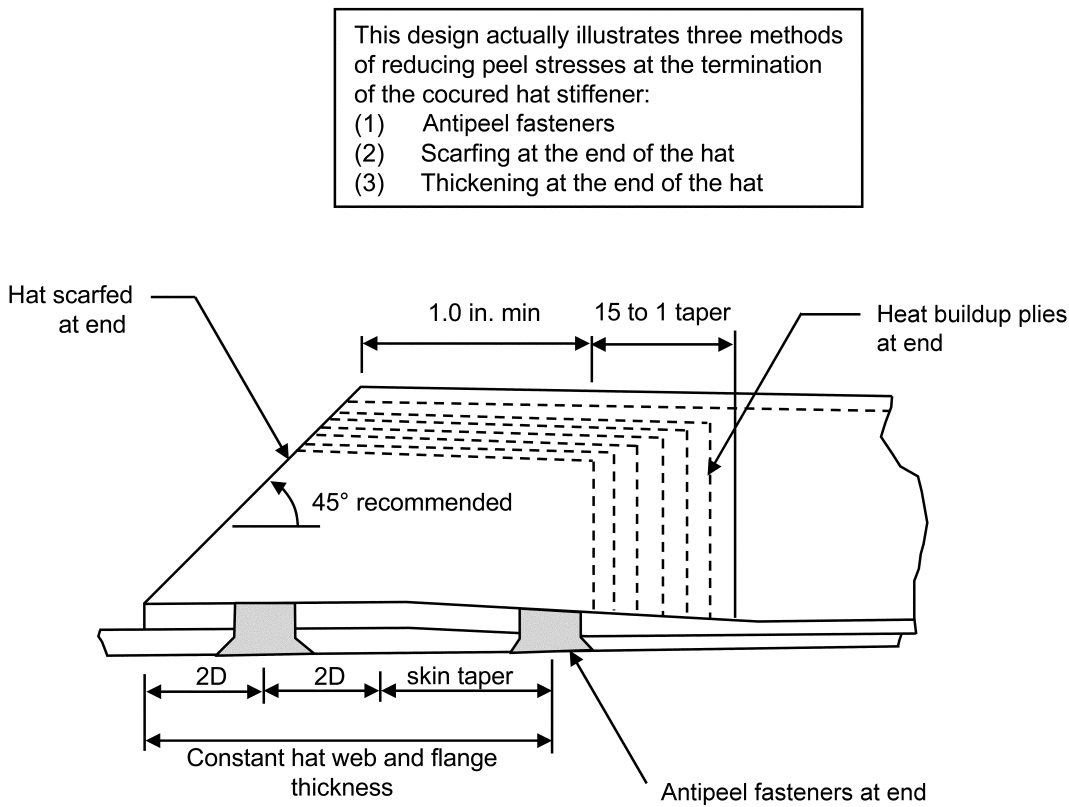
Bonded-bolted joint to prevent peel failures
